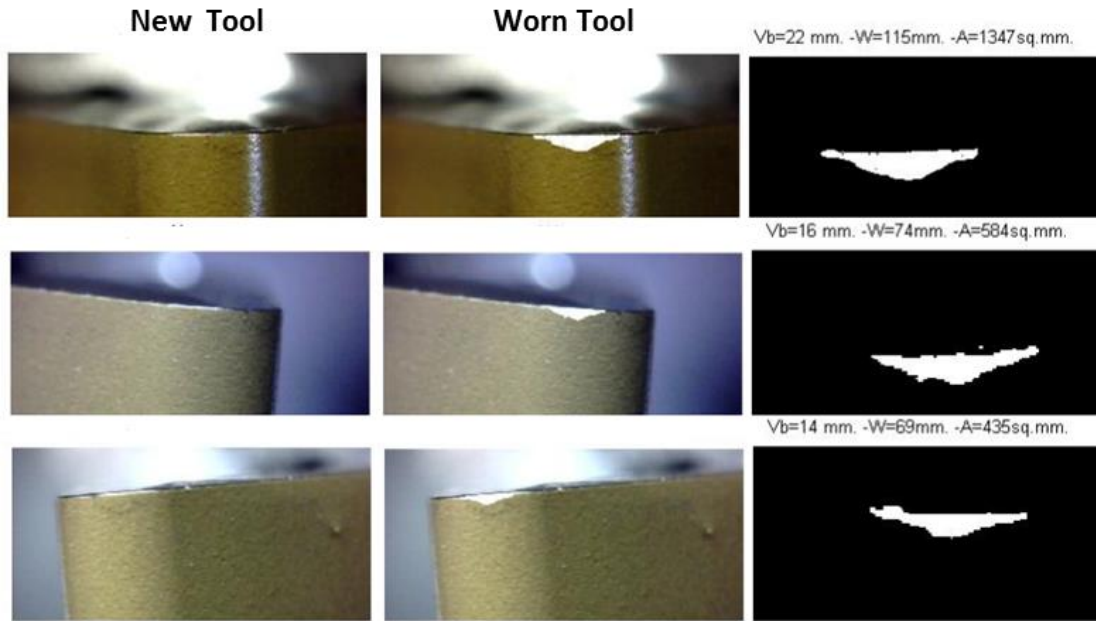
Subtraction technique used for determining flank wear on cutting edge
